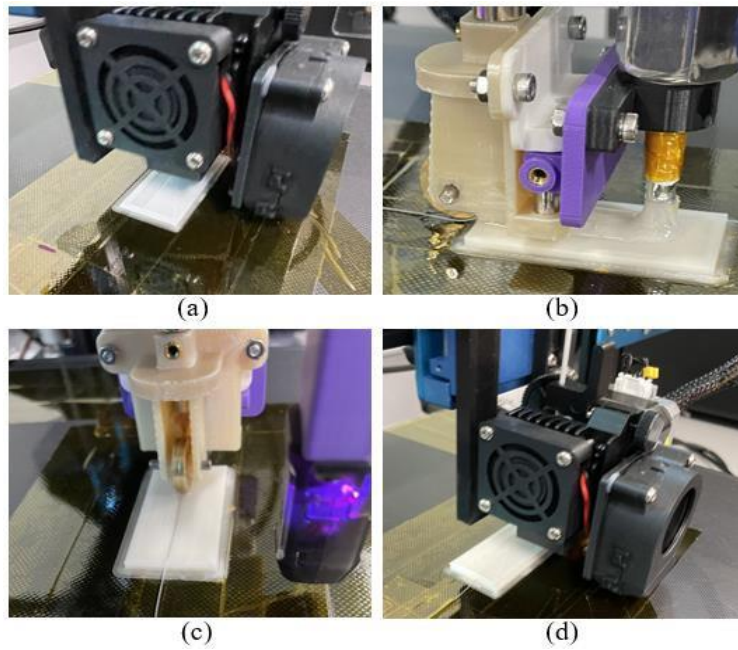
3D printing and wire embedding process for the wire pull specimens: (a) Printing base layer (b) Application of DCM (c) Wire embedding (d) Printing top layer to complete specimen
